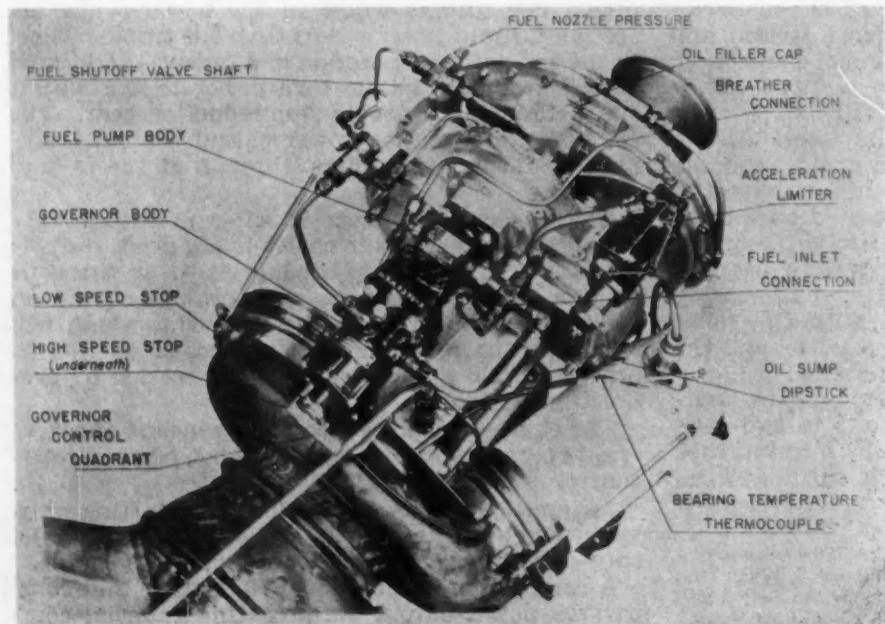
Photograph of Boeing Model 502 gas turbine engine
